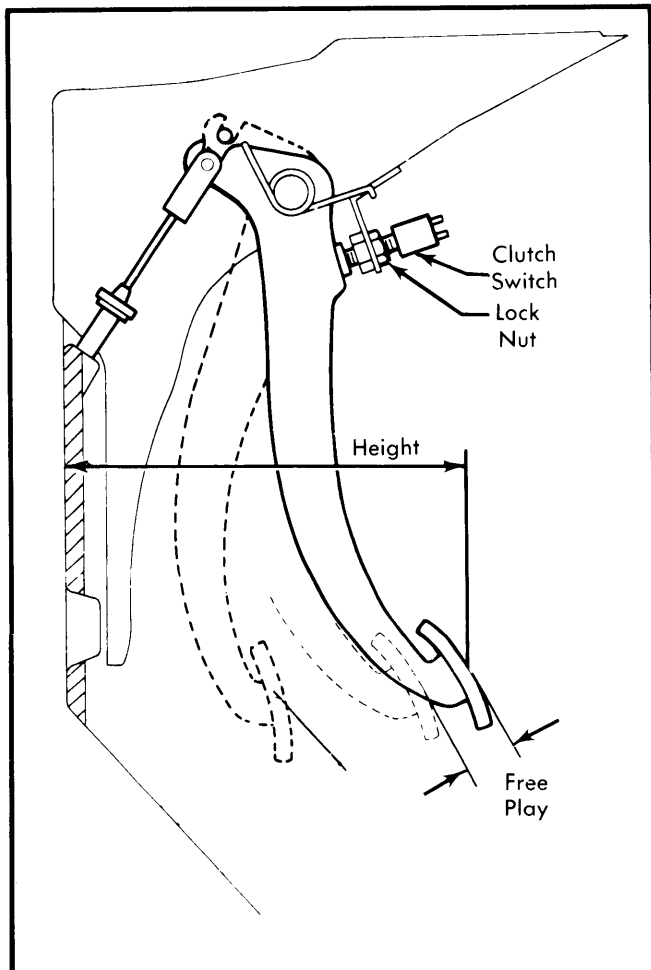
Clutch Pedal Adjustment (FWD Models)
